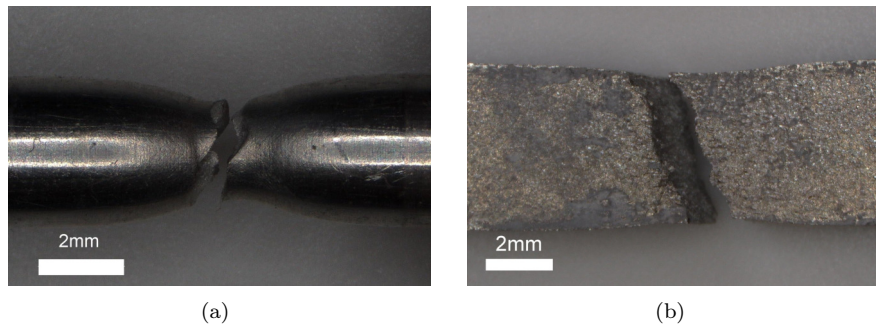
Failure of aluminum alloy tensile samples: (a) necking / cup-cone fracture on a cylindrical specimen, (b) shear band fracture on a plate-like specimen
